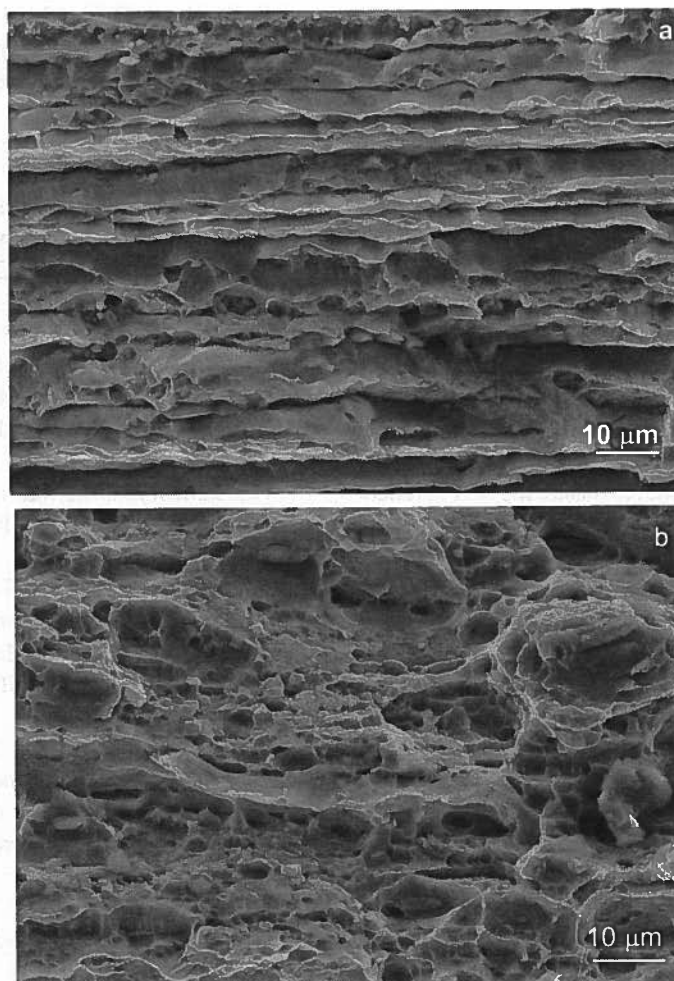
Representative fracture surface: (a) baseline and (b) friction stir welded
